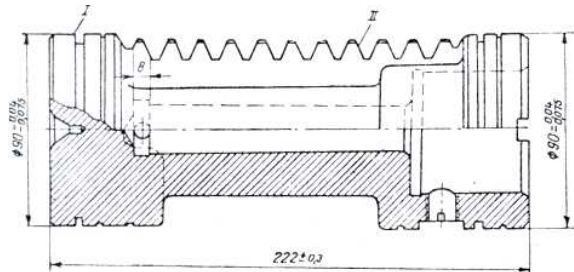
Hydraulic actuator piston / Pistonul servomotorului hidraulic
